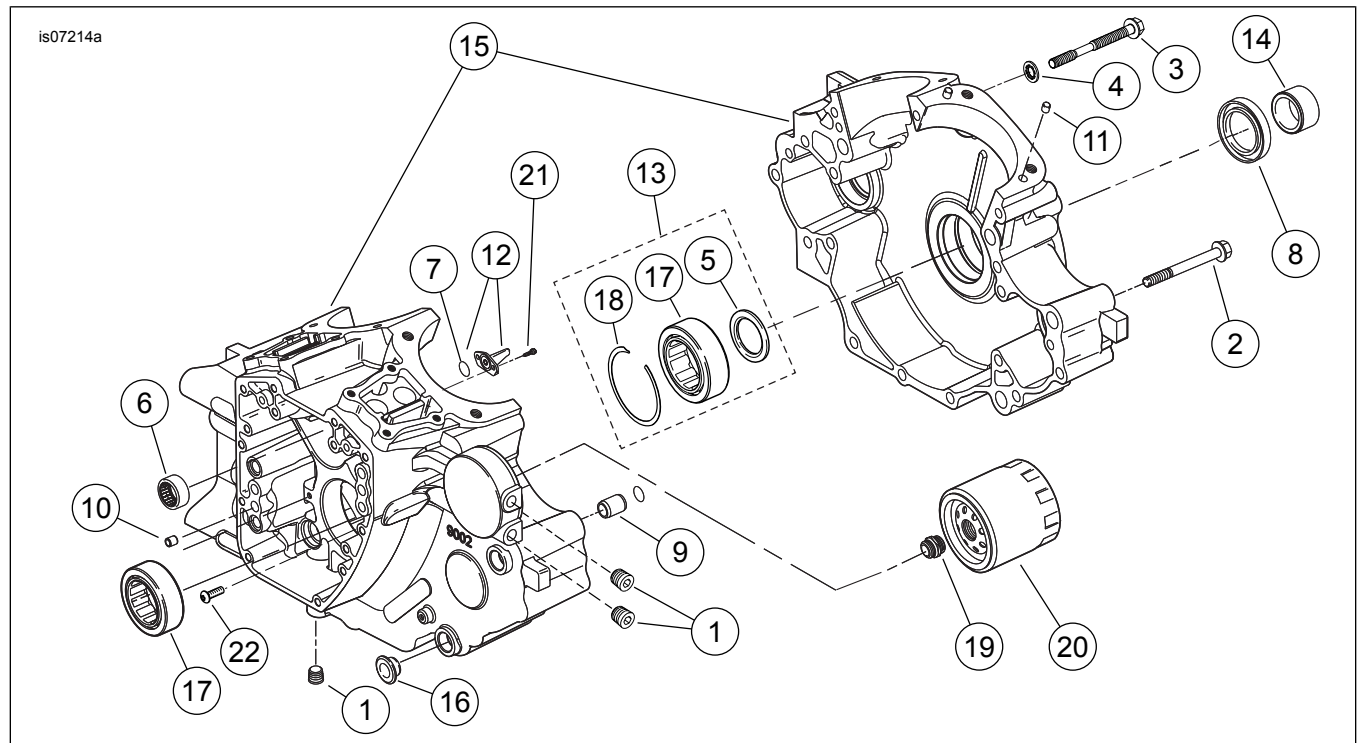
SE120R Screamin' Eagle Pro Crate Engine (Beta) Crankcase, Engine Oil Filter at Cooler
